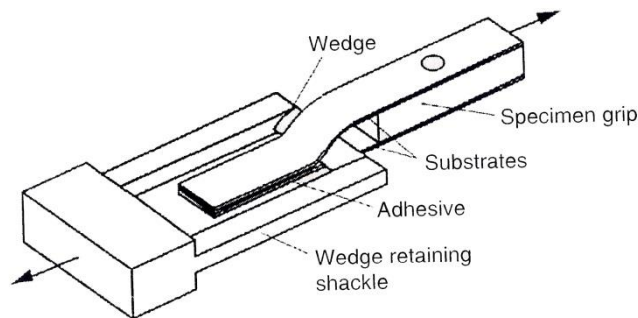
ISO 11343 wedge impact peel test specimen. [1]
